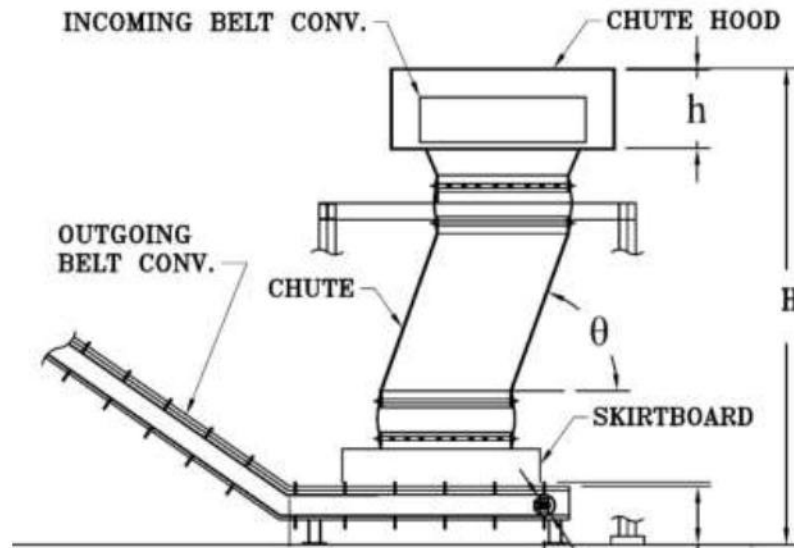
Conveyor to conveyor transfer - A typical arrangement
